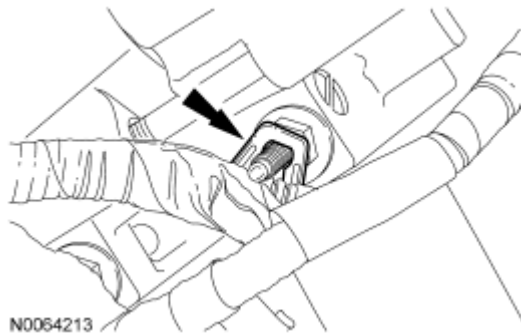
Locating Wire Harness Retainer From A/C Compressor Stud Bolt
